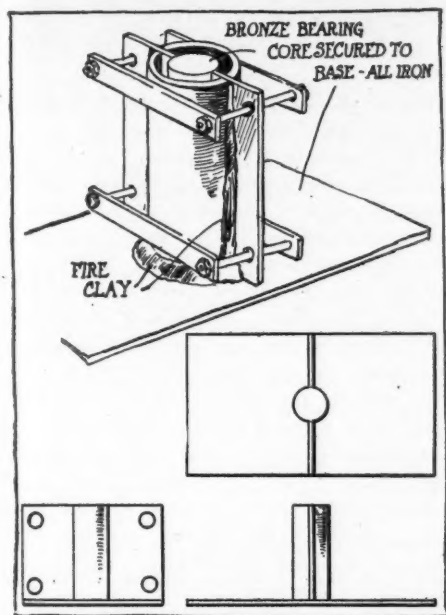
EQUIPMENT FOR RE-BABBITTING
